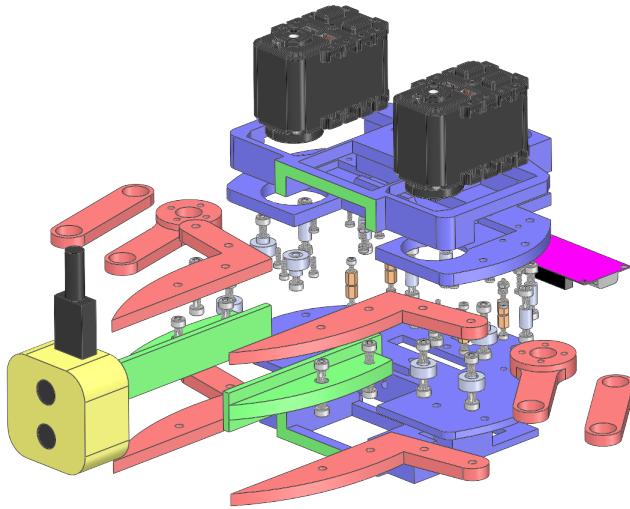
An exploded view of the robot gripper(22 unique parts and 120 total parts)
